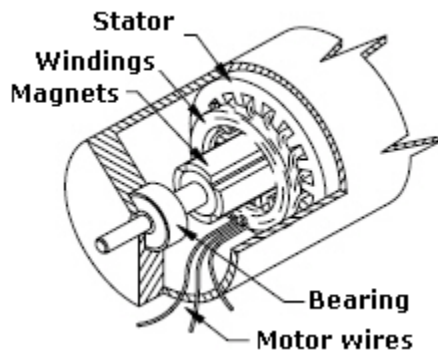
A brushless-type DC motor (Fadal Machines, 2008).
